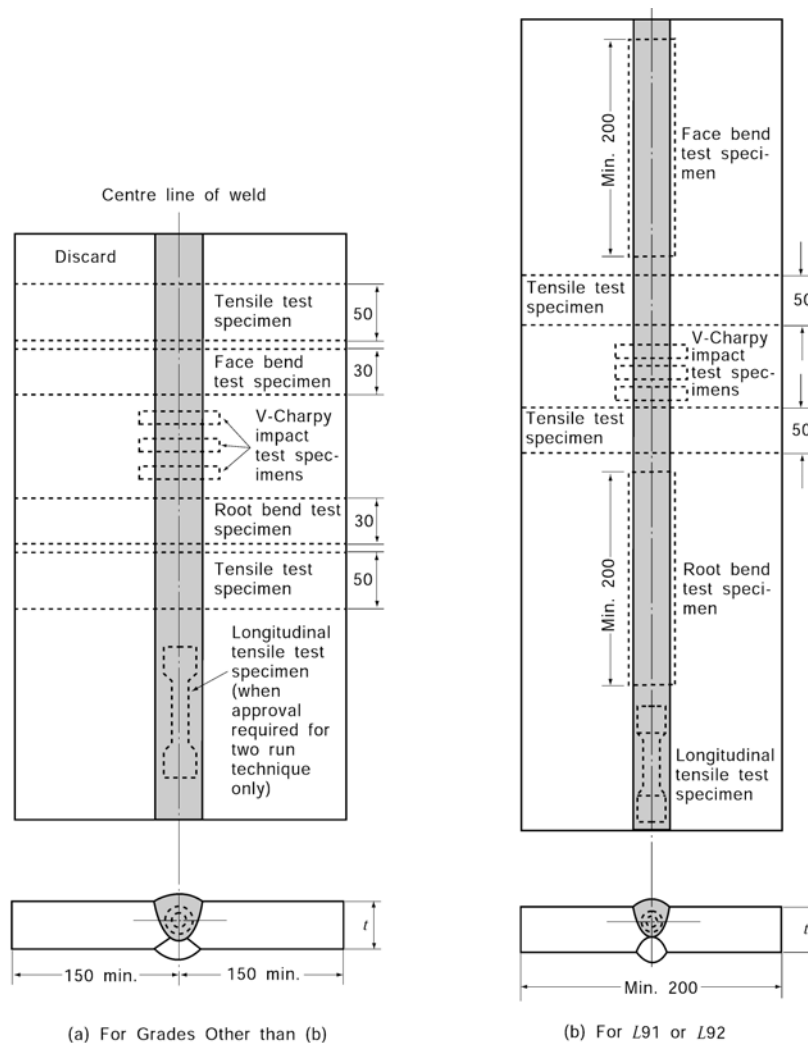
Buttt Weld Test Assembly with Two-run Technique (Automatic welding, Unit : mm, t : plate thickness)
